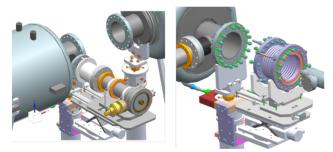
Coupler (left) and bellow (right) assembly table on cavity.
